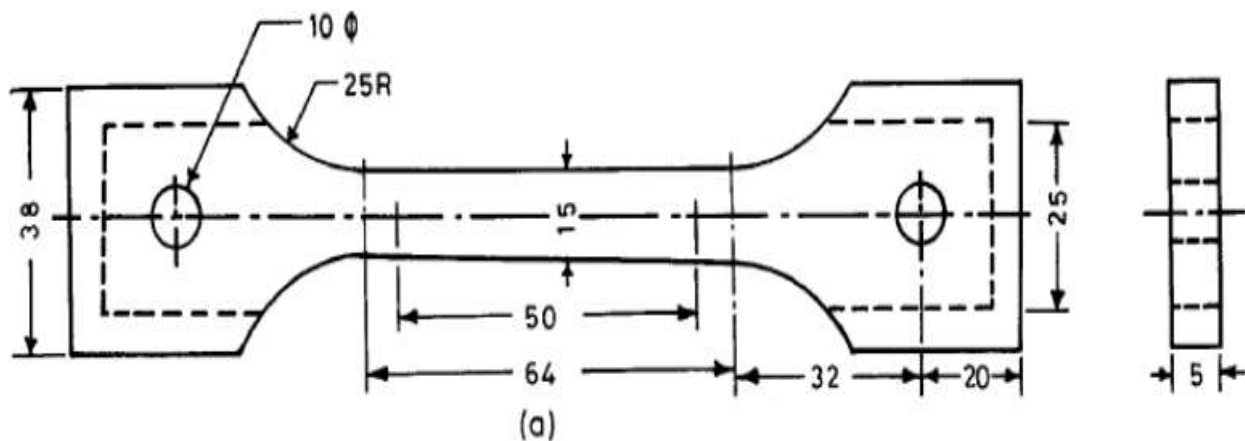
Geometry of tensile test specimen, dimensions in mm (ASTM D 638 Type 1).
